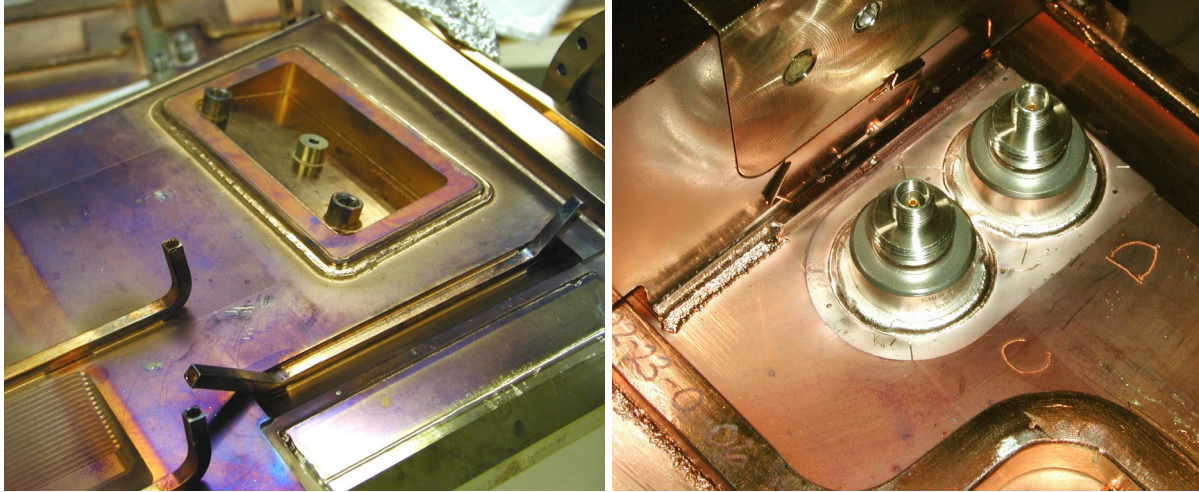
QFC Chamber Absorber, Cooling Bar and Eddy Break Weld.
